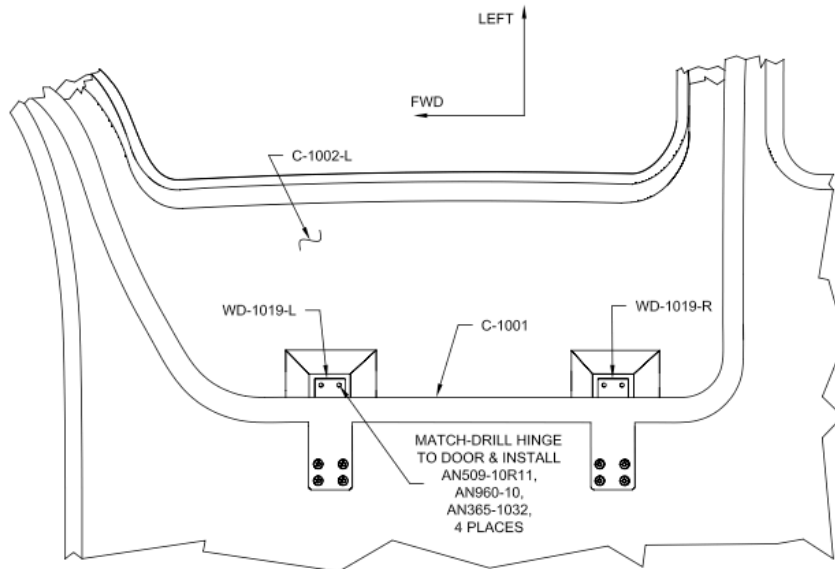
MATCH-DRILL DOOR HINGE OUTBOARD HOLES TO DOOR
